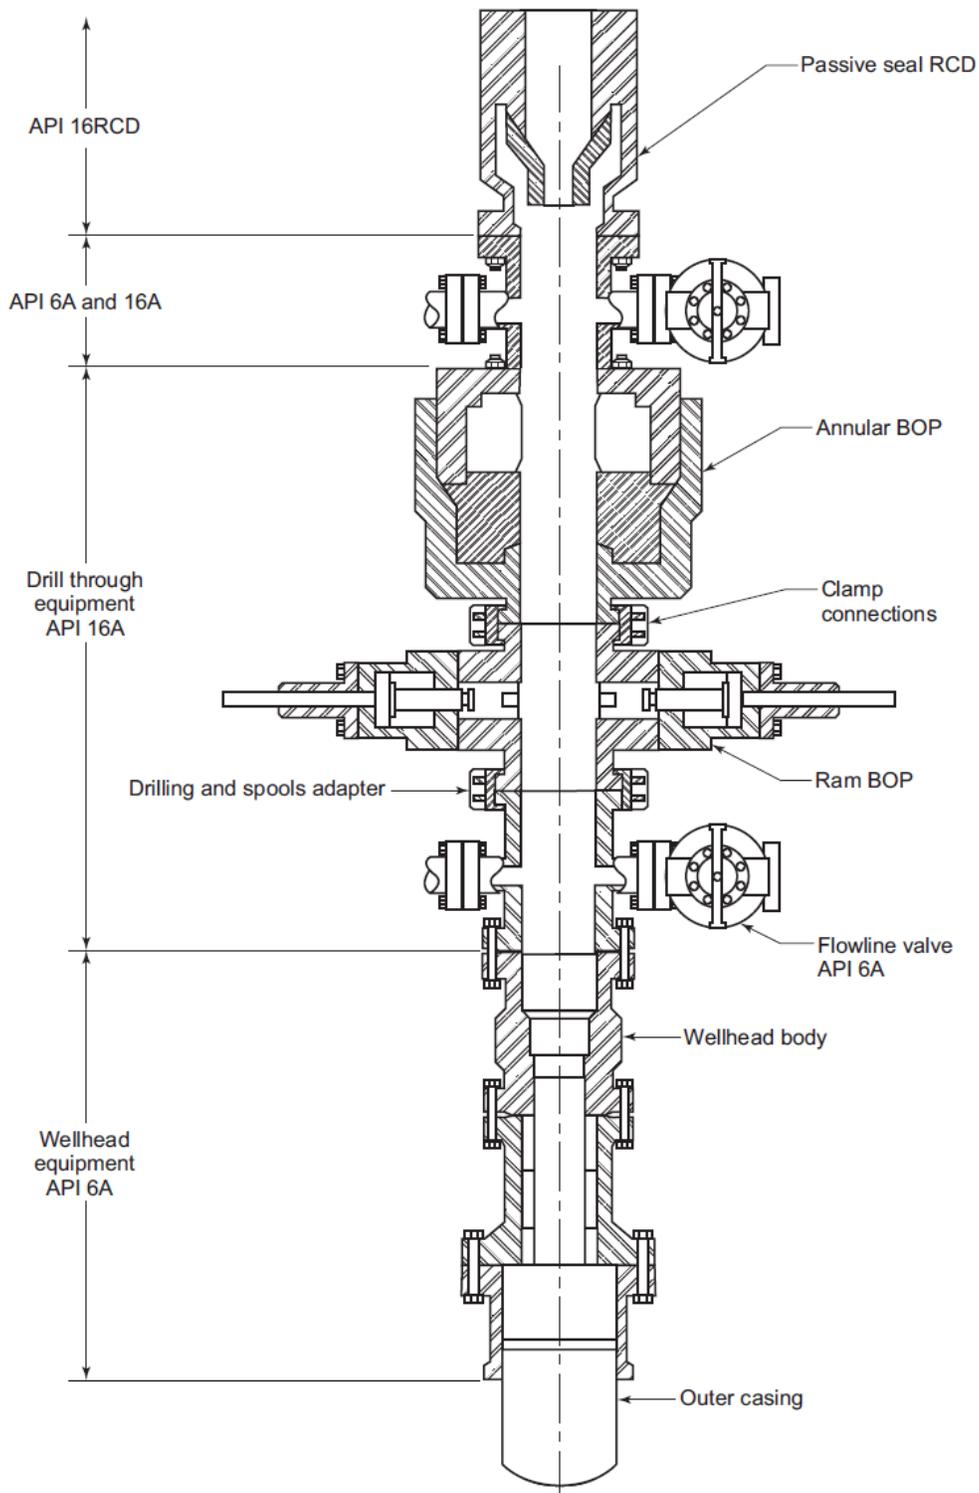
Typical Surface Stack illustrating a Passive Rotating Control Device System
